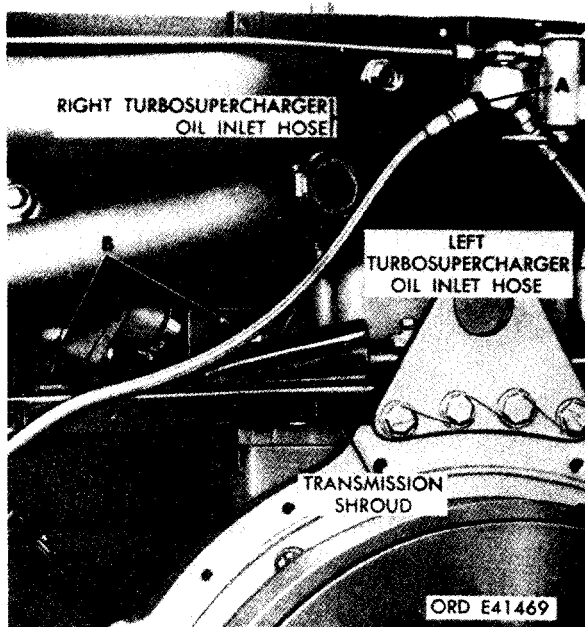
Removing or installing right turbosupercharger oil inlet hose and transmission shroud.
